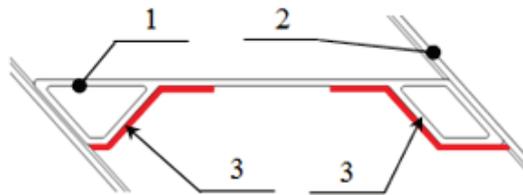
Modified scheme of the arrangement of welds for the examined aluminium stair-step: 1 – tread, 2 – stringer (side member), 3 – continuous fillet weld
